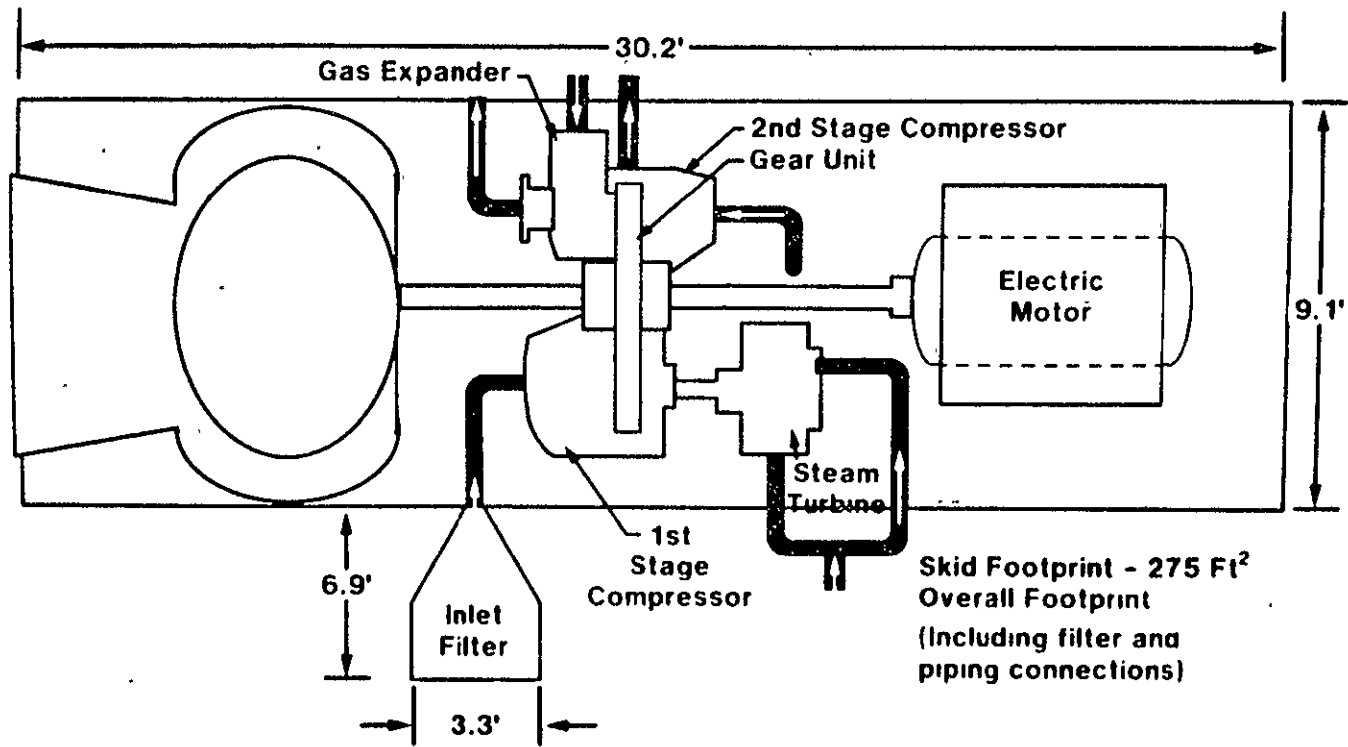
Rotating Equipment System (RES) Arrangement Top View
